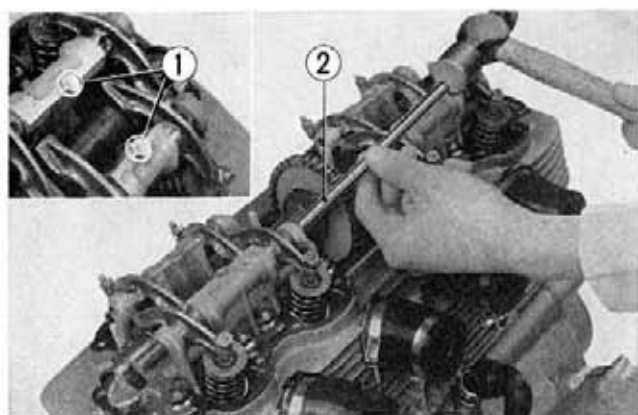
① Rocker arm shaft mounting bolts
